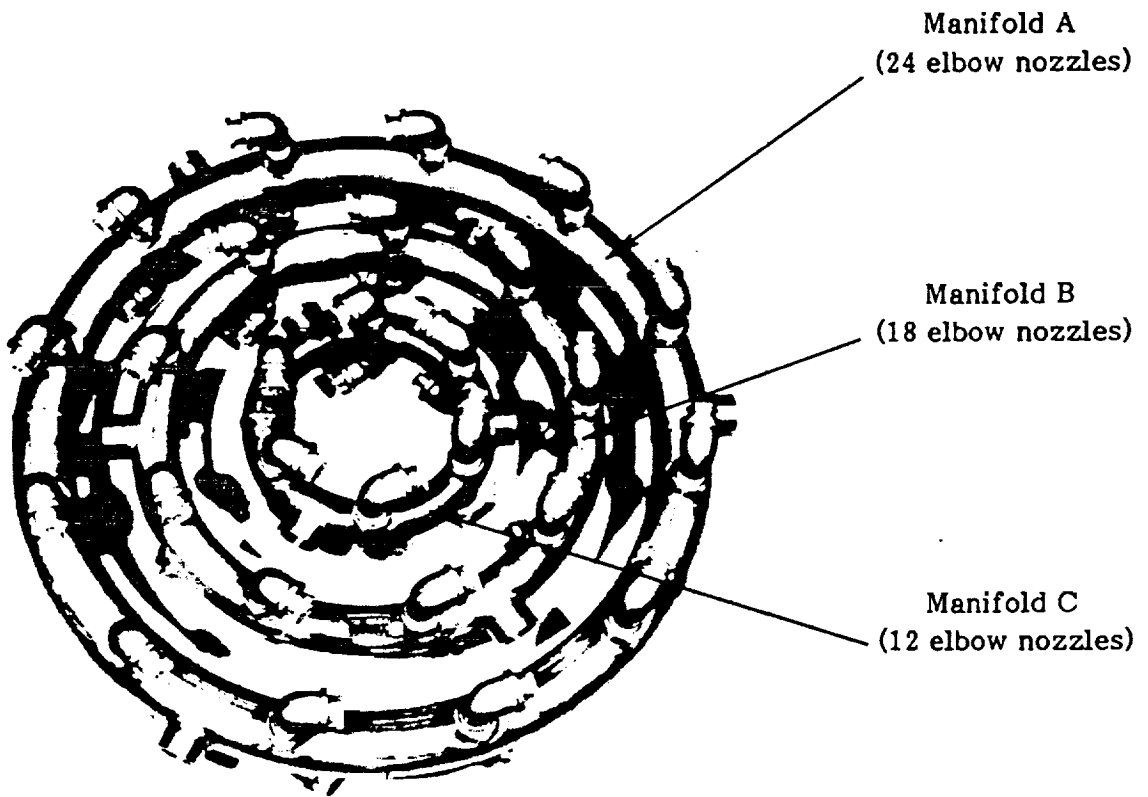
Manifold rings and elbow nozzles (unassembled).
